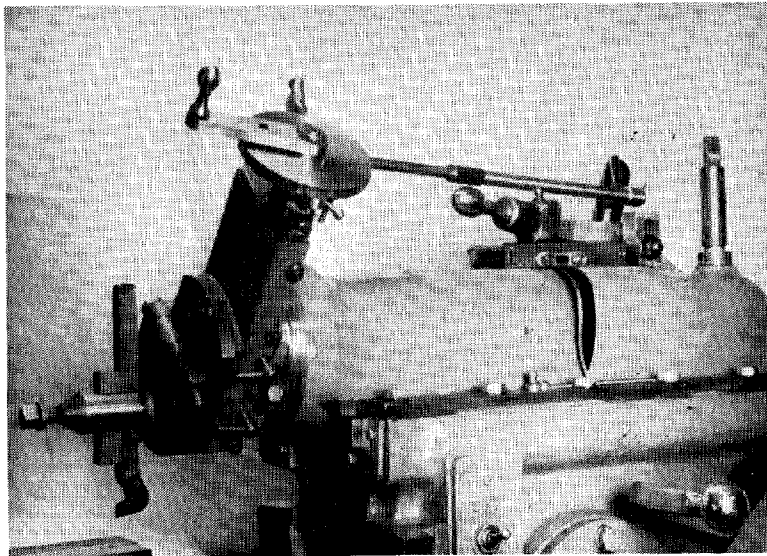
The Down Feed Mechanism assembled on the Shaping Machine
